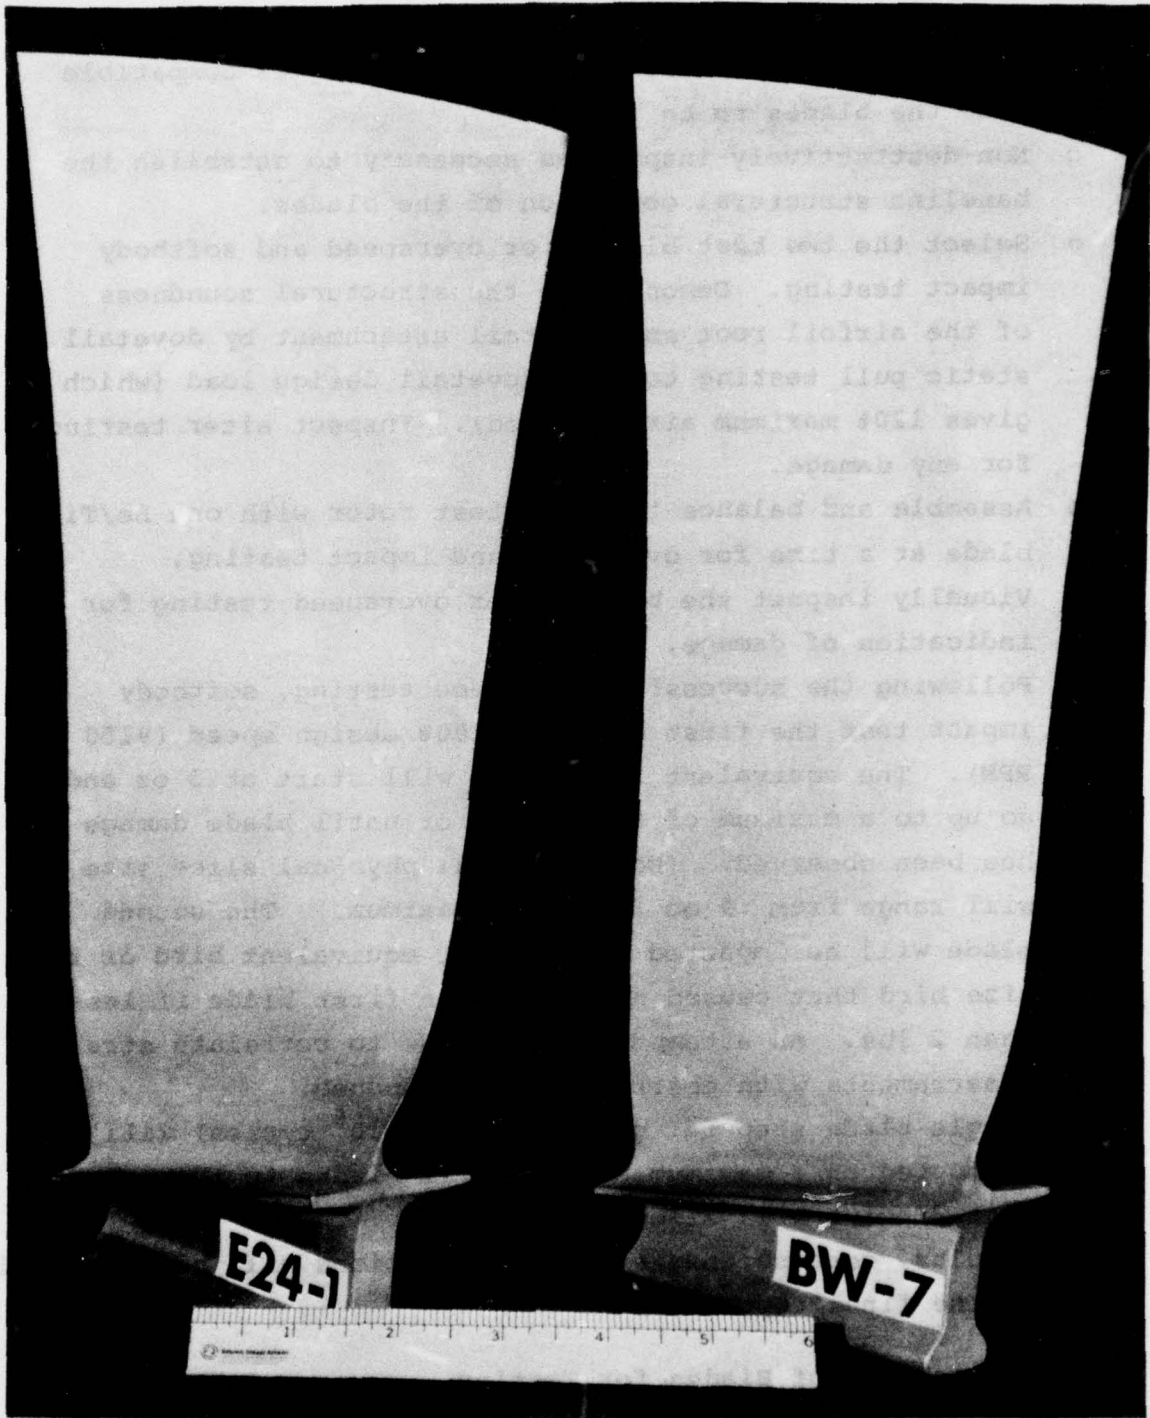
Finish machined TF41 Be/Ti Composite LP-1 Fan Blades
